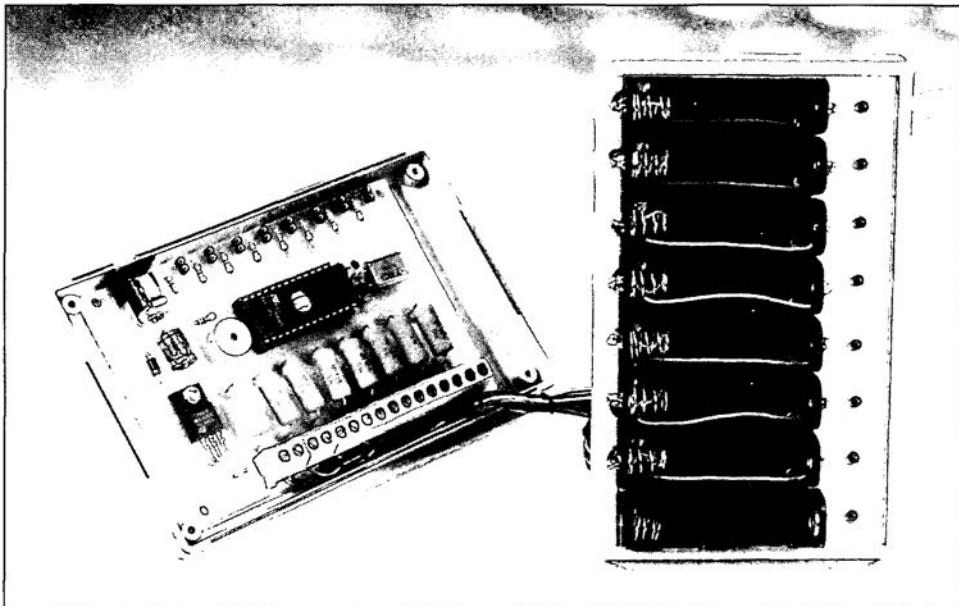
Printed circuit board designed for the tester (board available ready-made, see page 70).
